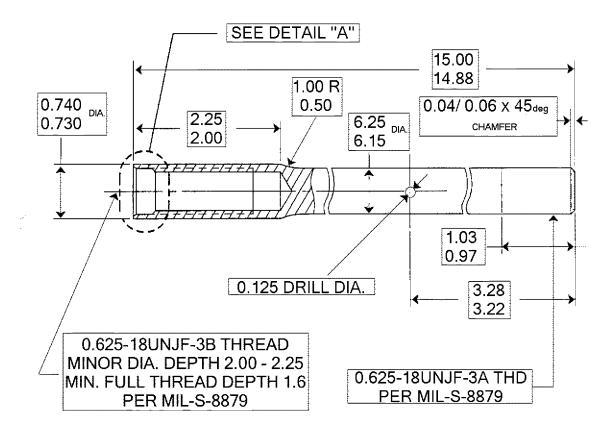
Fabrication of Expandable Pin Cleaning Tool
